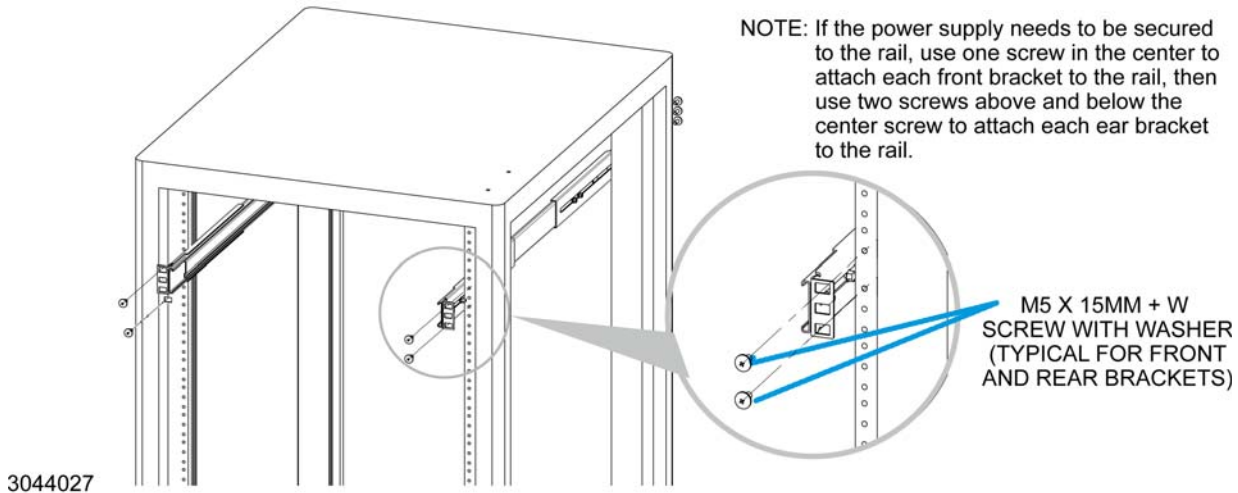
INSTALLING FRONT AND REAR BRACKETS ON CABINET RAILS
